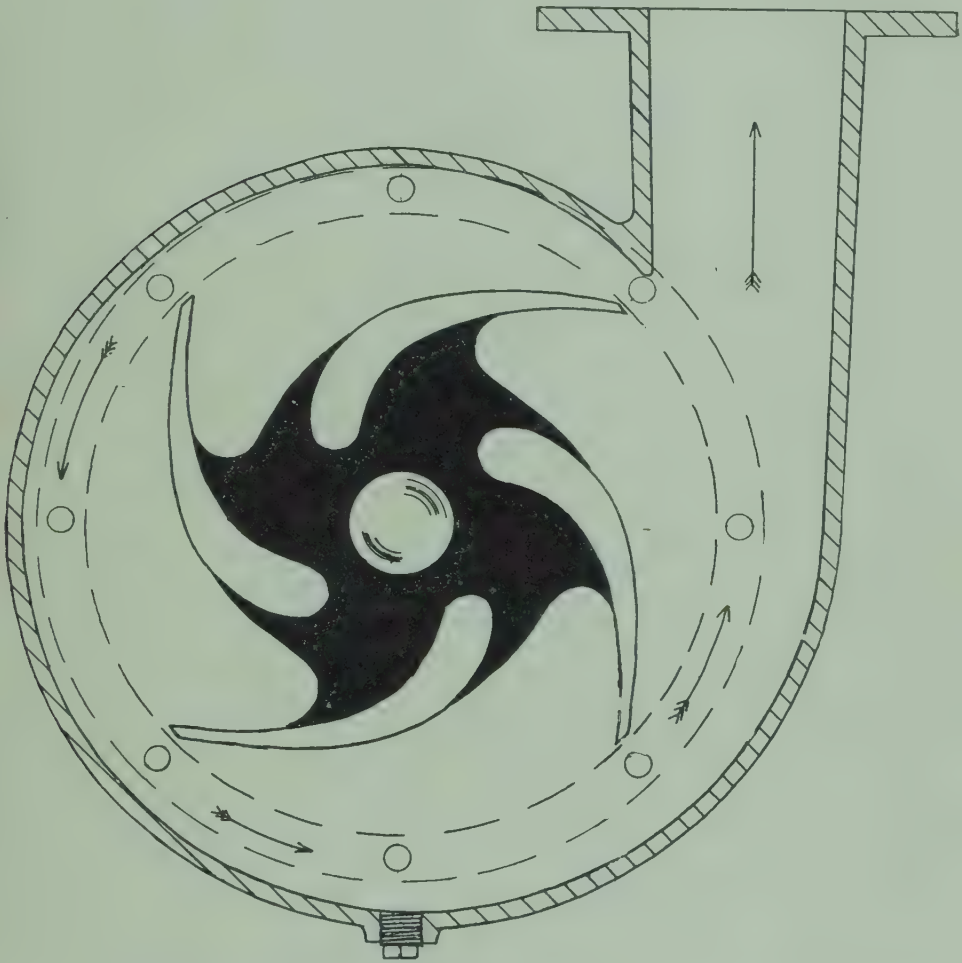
Centrifugal Pump, Impeller mounted in volute casing showing backward sweep of impeller vanes.
